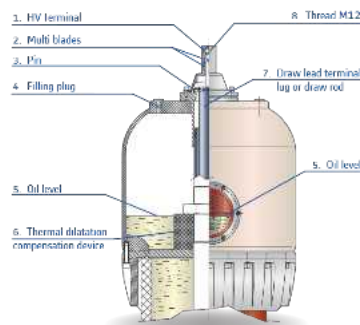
H 5 head type (Draw lead or draw rod 550 kV)
